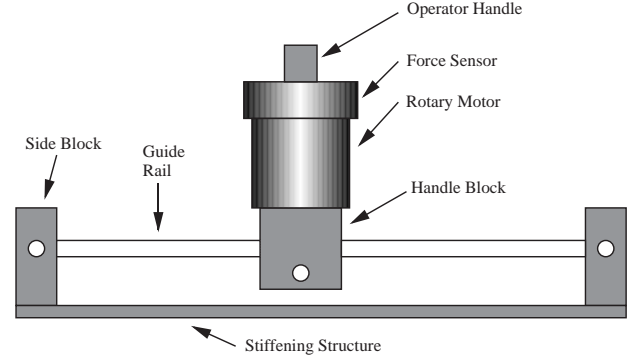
Vertical assembly of the mechanism X axis. This assembly moves along rails through the side blocks; the handle block moves with it, and also is moved laterally by an orthogonal Y assembly that is of similar construction.
